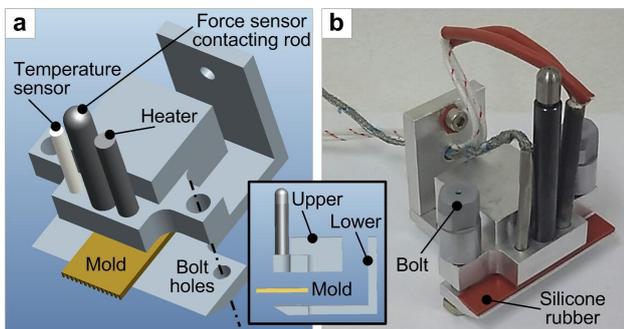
(a) Detailed modeling view and (b) completed prototype of a heating arm head where a resistive heater, a temperature sensor, and a rod for contacting the force sensor arm are fully installed
